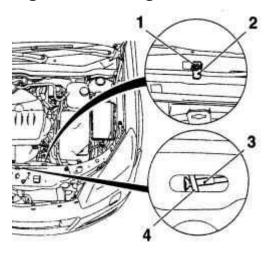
Mounting a drive cable to lock the hood: 1 - attachment bolt, 2 - cable holder, 3 - drive cable, 4 - locking bonnet
